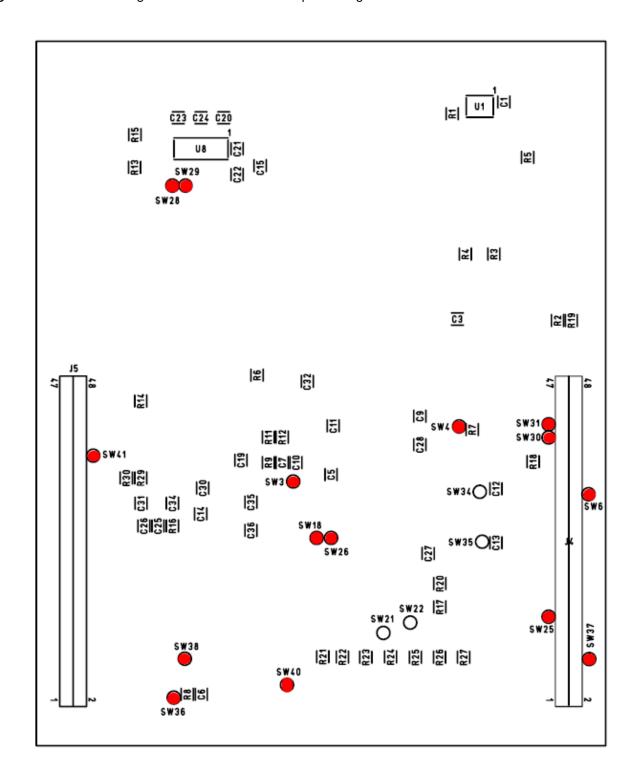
Default Configuration : Solder Side - Jumper Configuration
